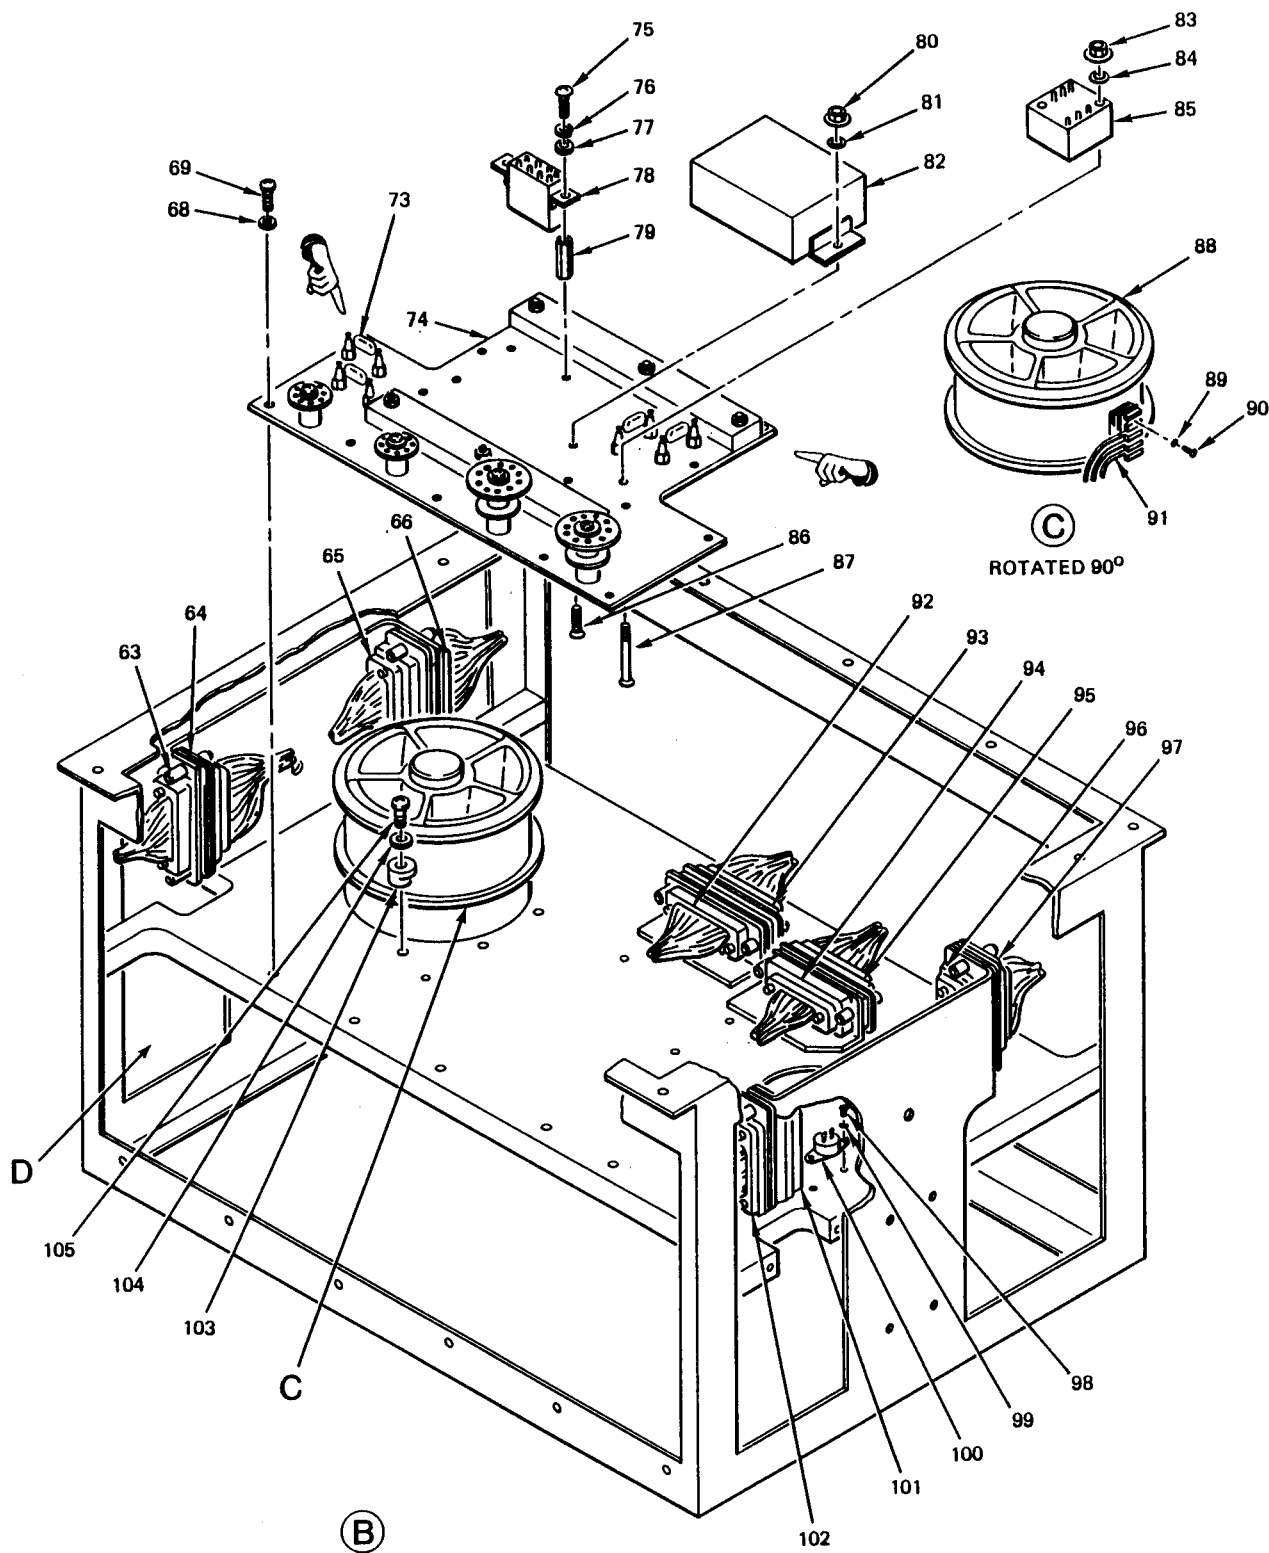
Signal Processor Unit Exploded View (Sheet 2 of 4)
